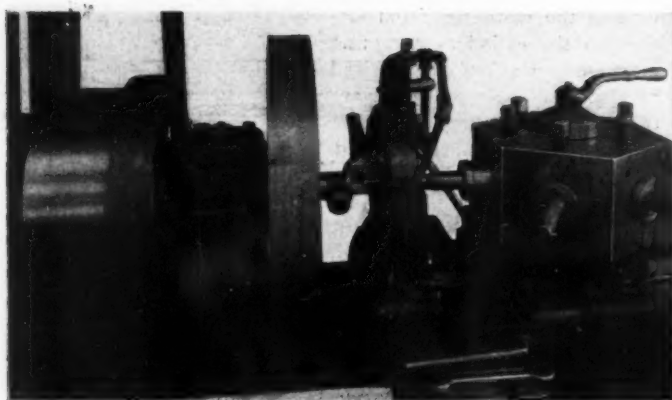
Turret lathe working on a nickel steel steering pivot held in a steady rest
